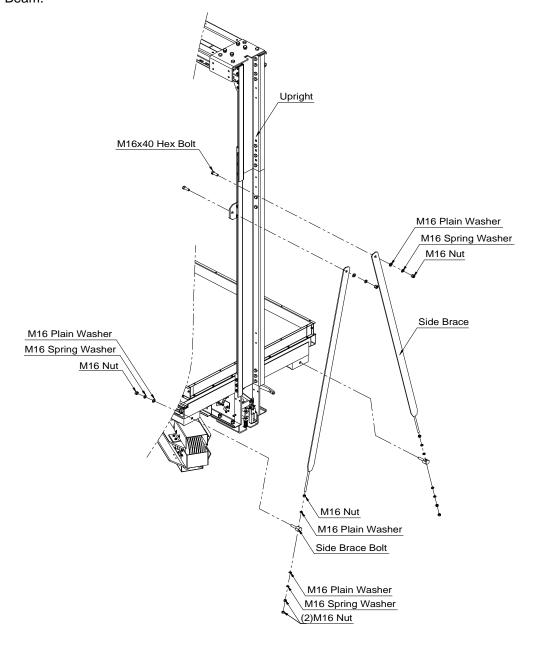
SIDE BRACE INSTALLATION (Underslung Skewed type)
